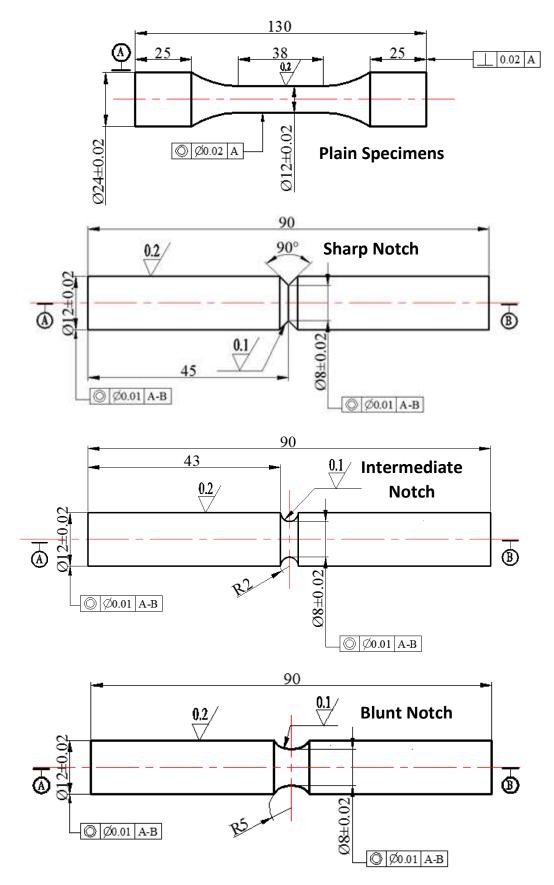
Geometries of the tested specimens (dimensions in millimetres).
